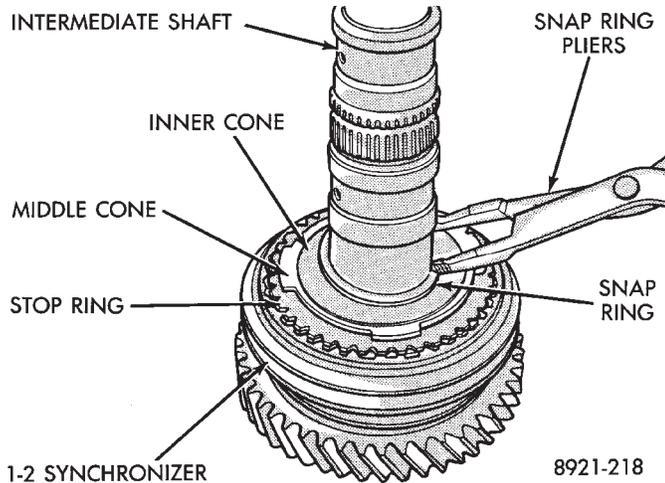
1st Speed Gear and 1-2 Synchronizer Assembly
